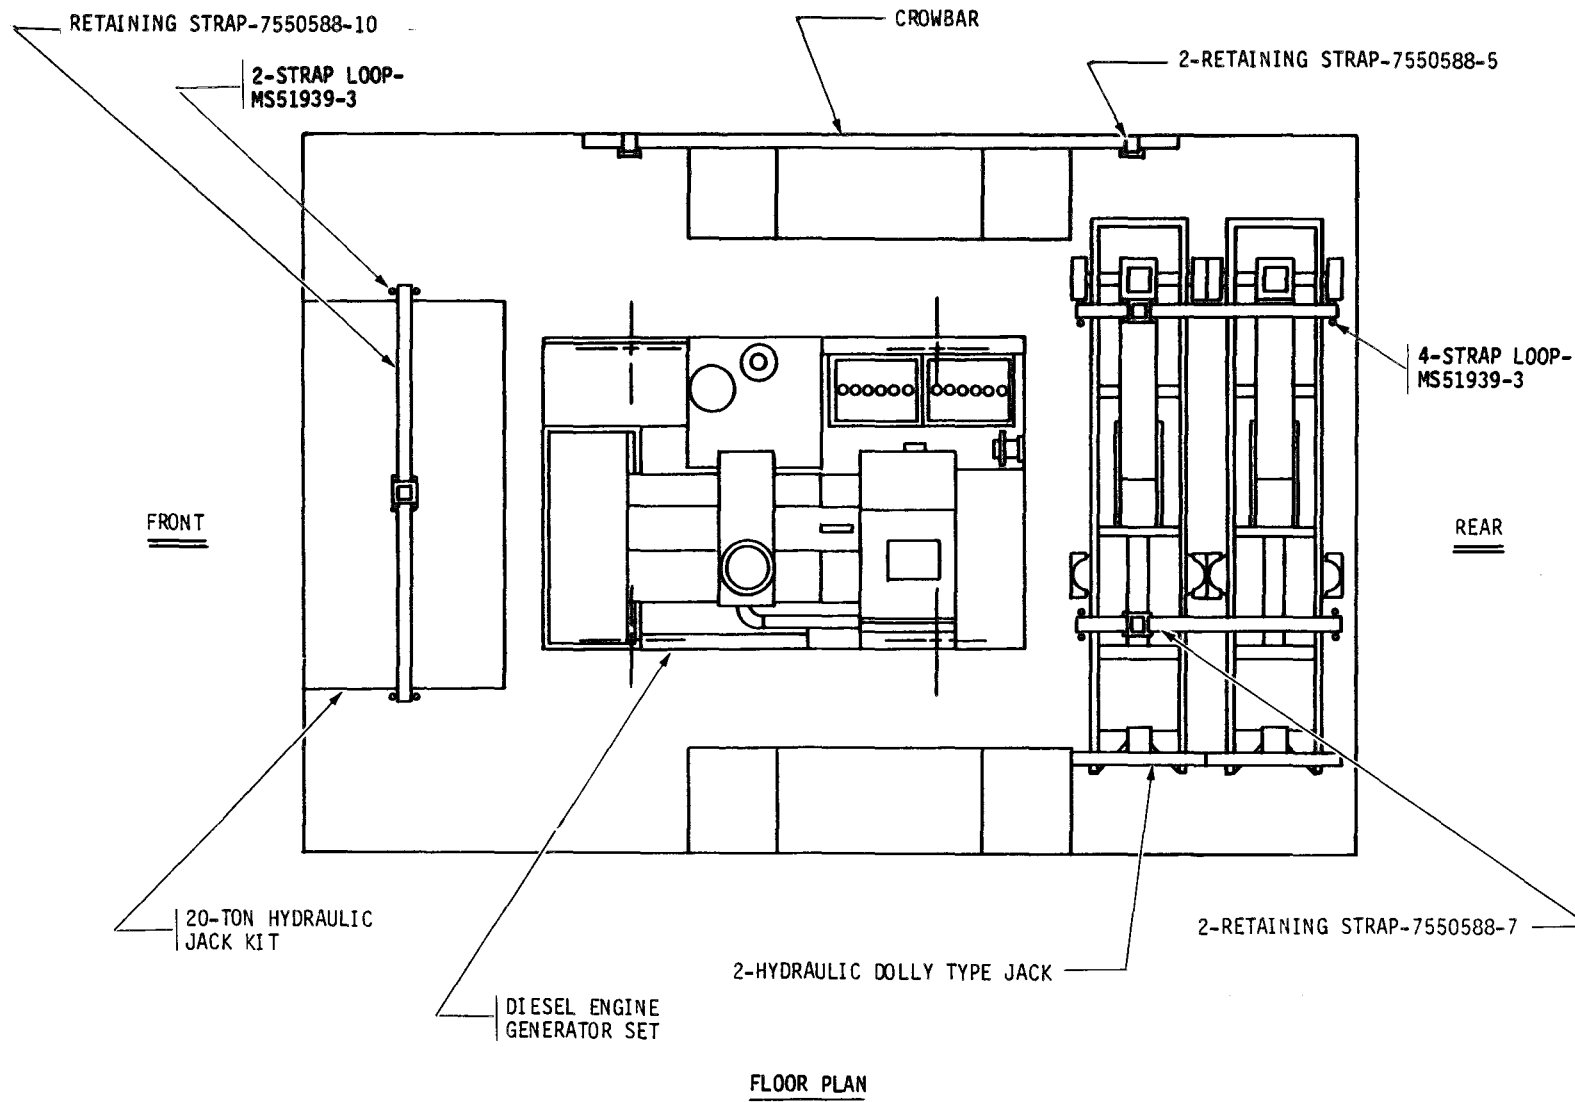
Components to be mounted, floor plan, unit 3, M105A2.
